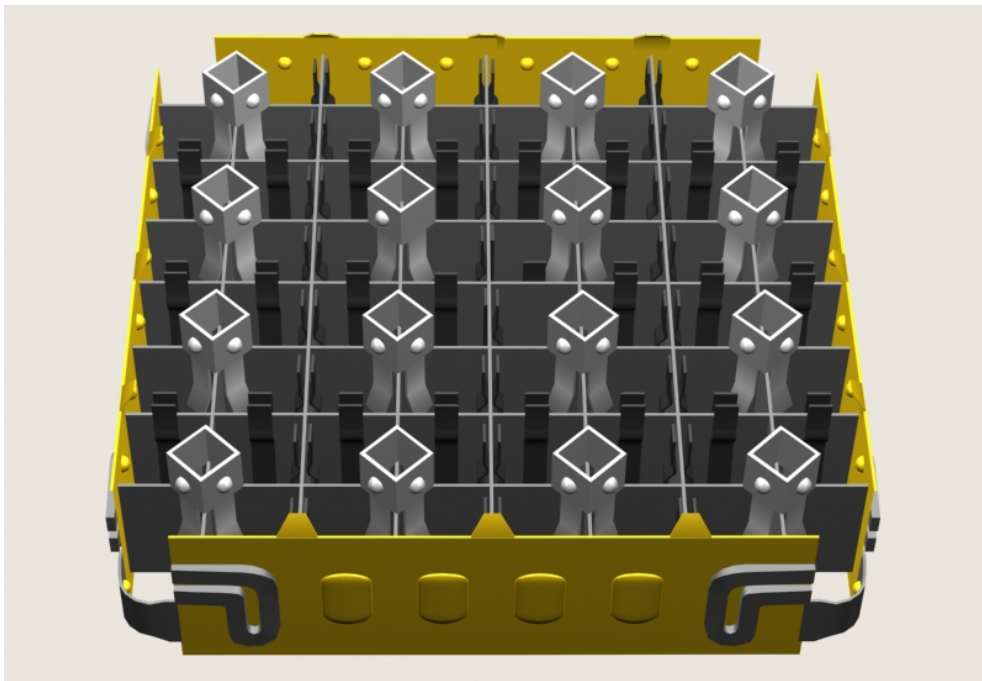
Ferrule Spacer Design- Dimensions
